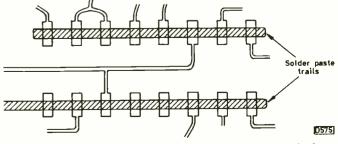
How to apply solder paste to the PCB lands before positioning the new i.c. in place ready for soldering.
